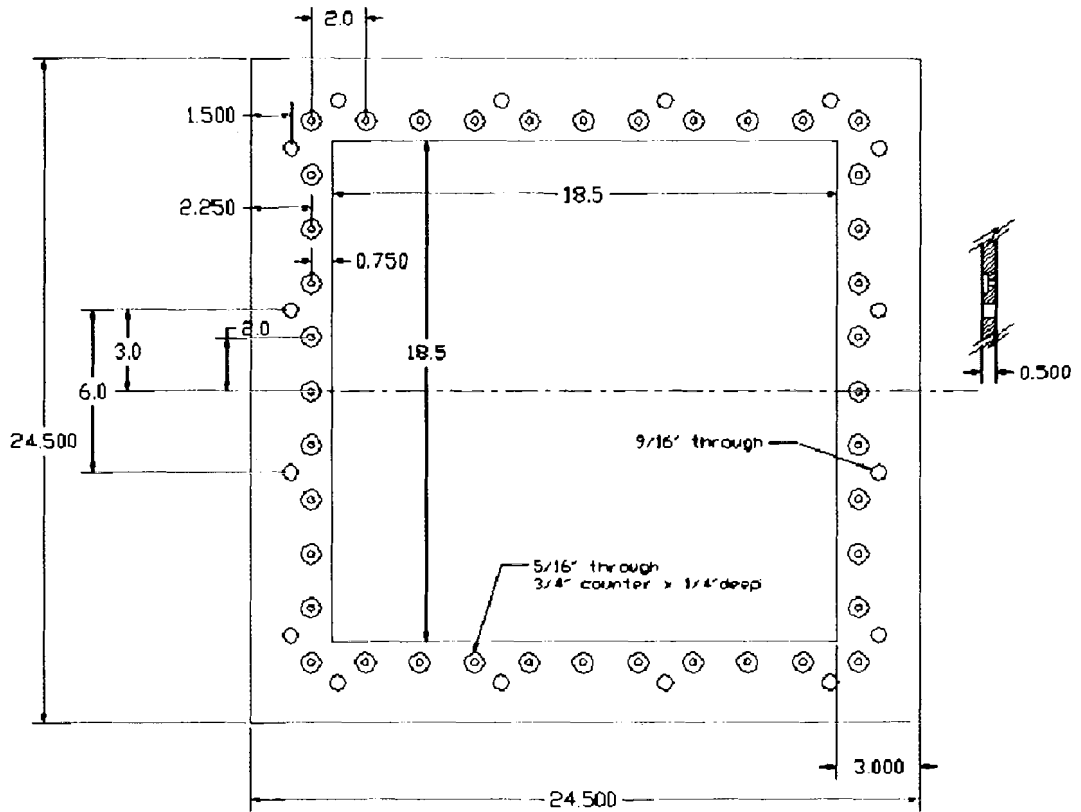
Steel Frame Schematic with Dimensions in Inches
